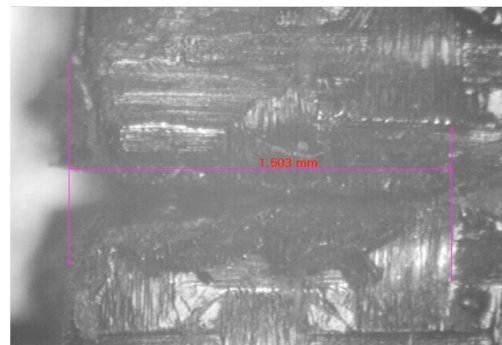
Measurement of damage crack length at circular hole edge notch.
